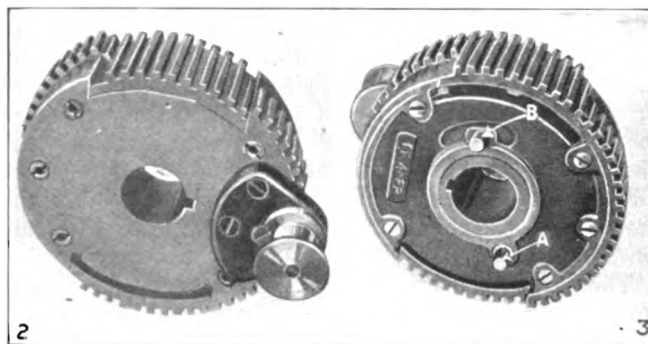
CRANK SIDE OF GEAR. FIG. 3. COVER SIDE OF GEAR
